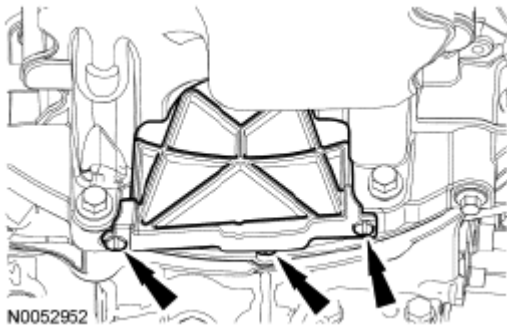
Locating Inspection Cover & Fasteners
